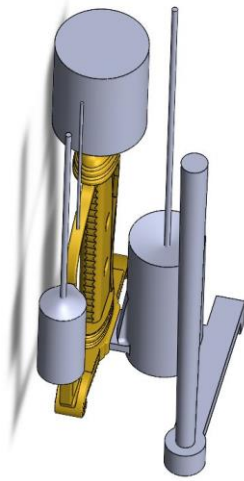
SolidWorks assembly of the hilt gating used in 3D-printed molds
